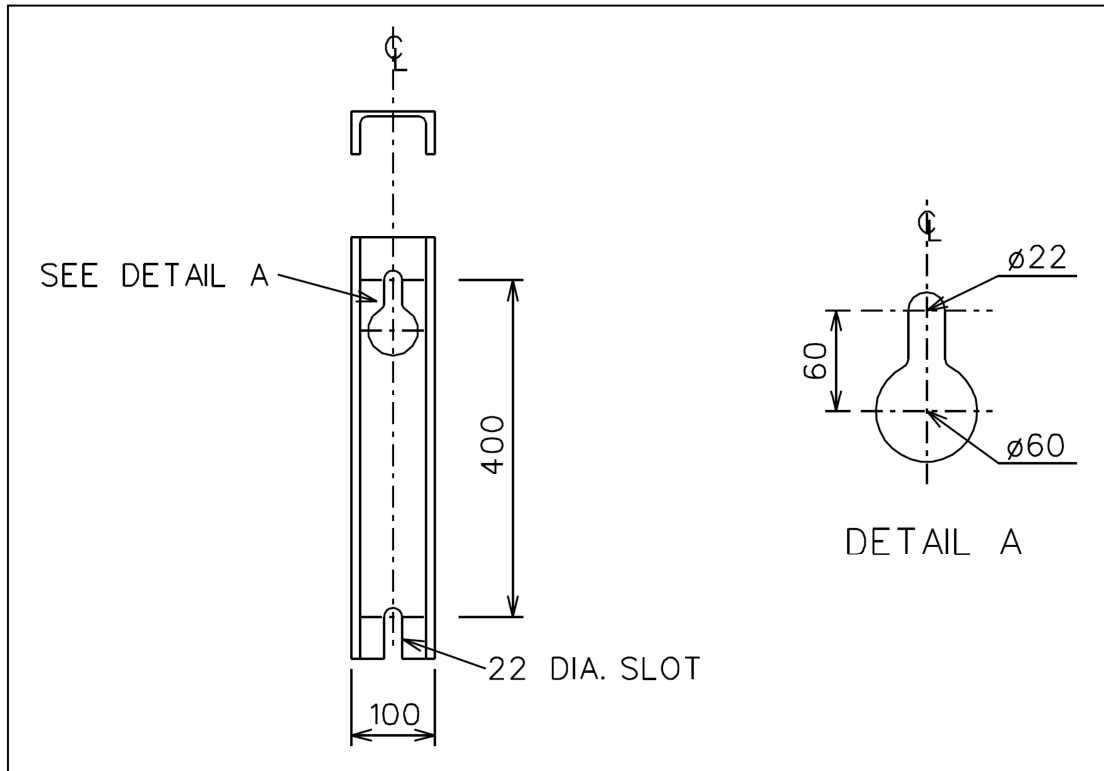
Mounting holes for circuit-breaker mounting bracket.
